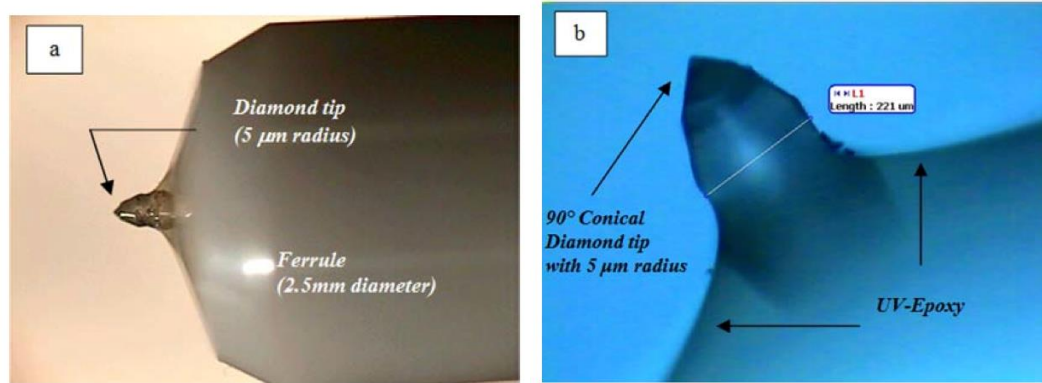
a) Wide view of the ferrule and attached diamond machining tool. b) Close-up of the diamond machining tool. [15]
